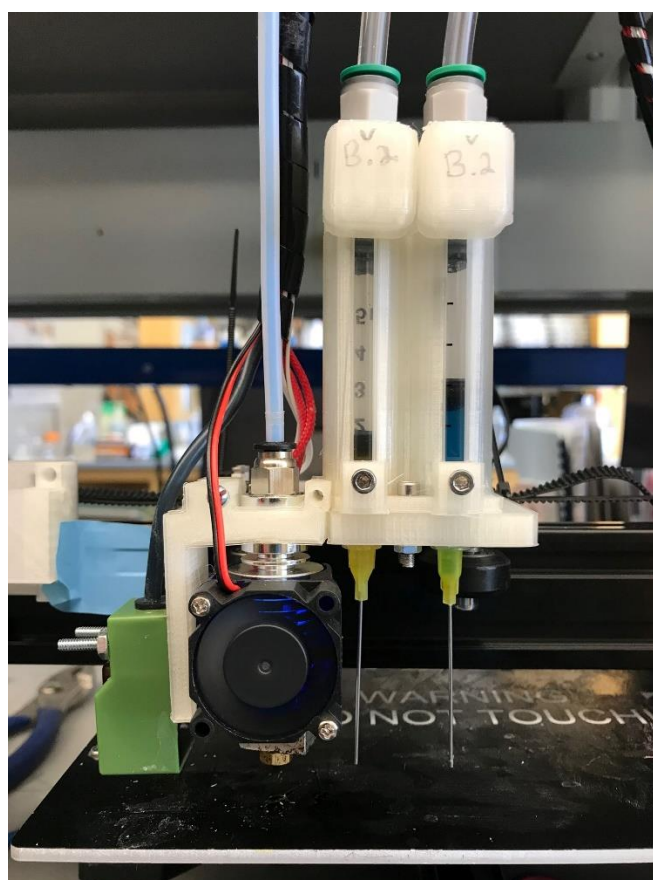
Assembled Carriage with Thermoplastic Extruder and Syringes
